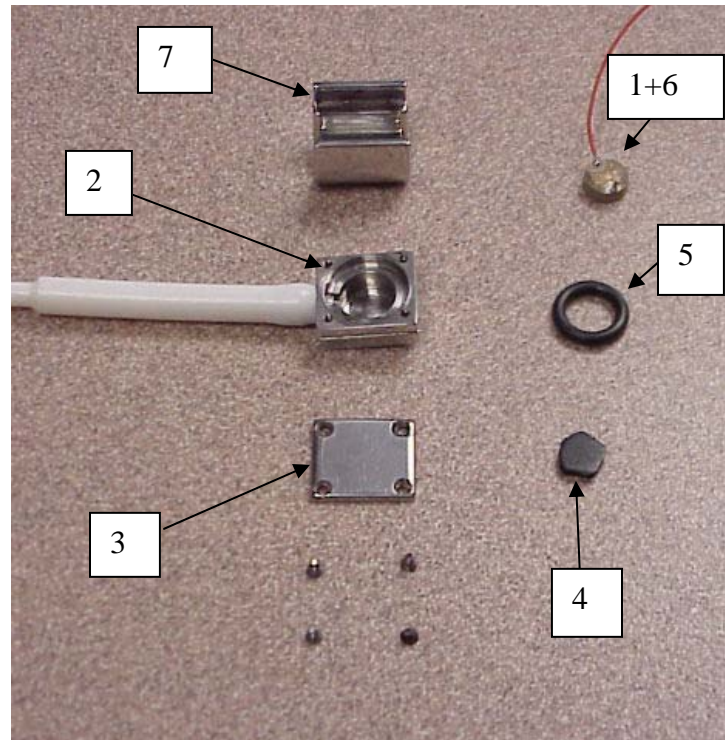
Disassembled implantable tonometer. (1) pin (2) stainless steel housing (3) Stainless steel lid (4) Rubber layer generating prestress (5) O-ring (6) PZT transducer (7) U-shape supporting structure
